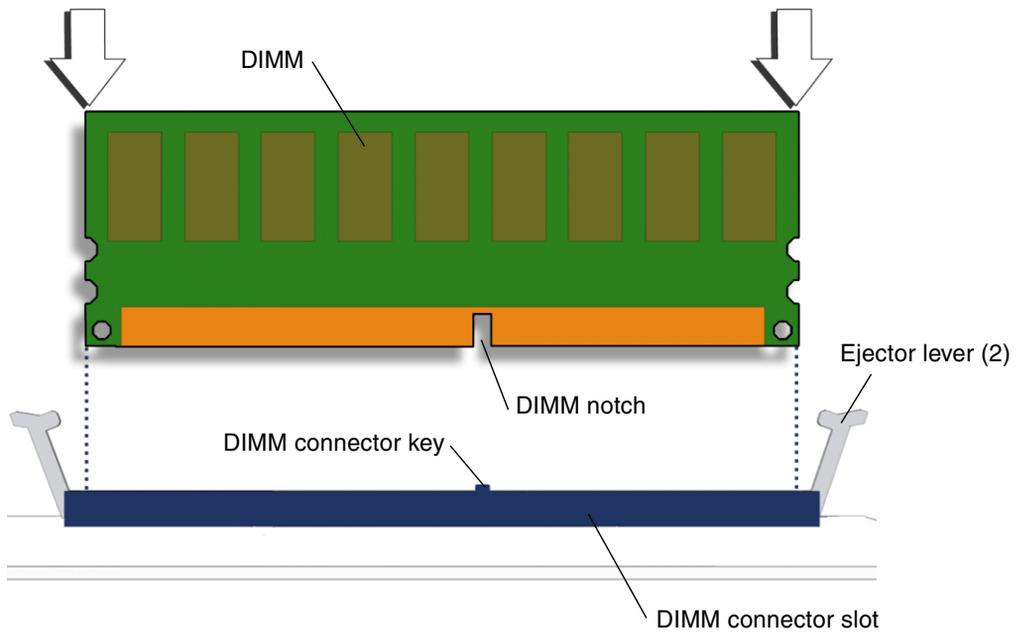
Aligning the DIMM to the DIMM Connector Slot
